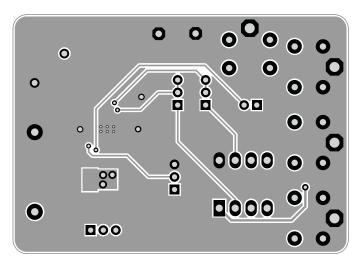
AAT1272 Evaluation Board Bottom Side Layout.
